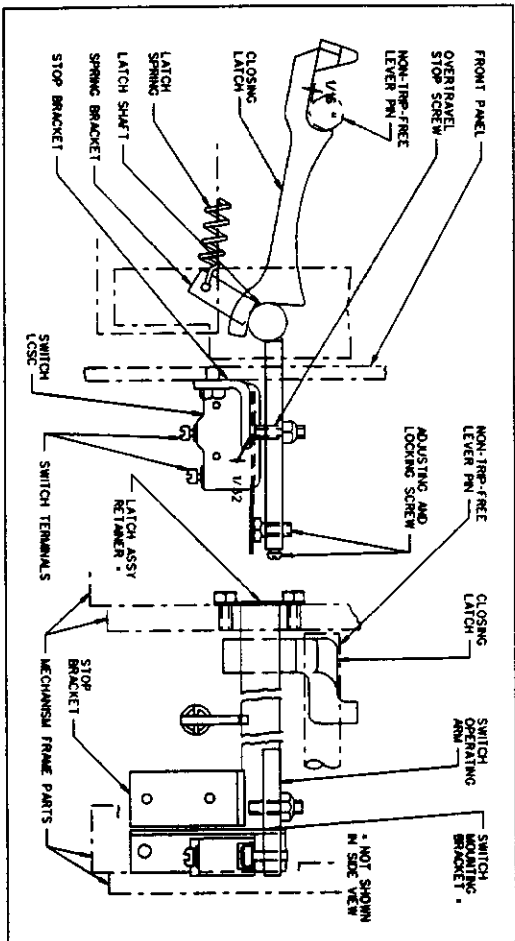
Alternate Design of Closing Latch and Closing Latch Check Switch LCSC
